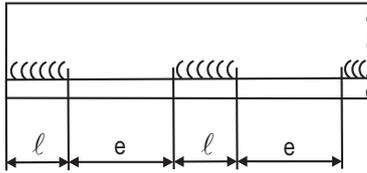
For the analysis of weld seam shear stresses, τ_{II} , in intermittent welds
